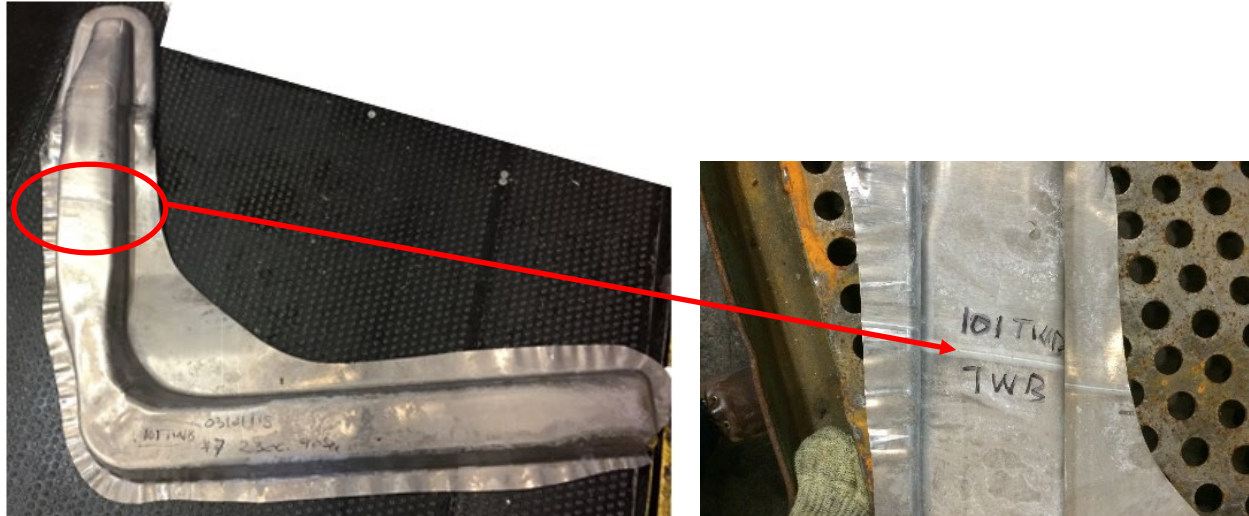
B.11. Part formed using a tailor-welded blank. Source: TWB Company.
